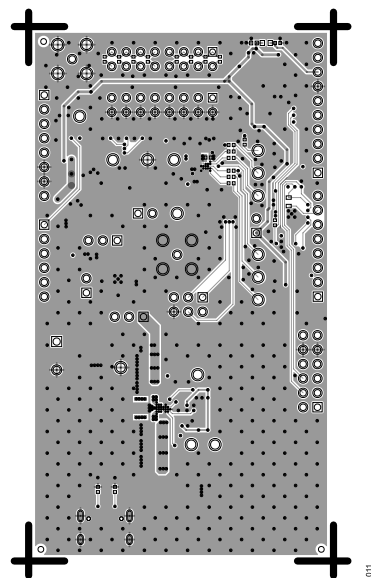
EVAL-AD3530RARDZ Bottom Side Routing
